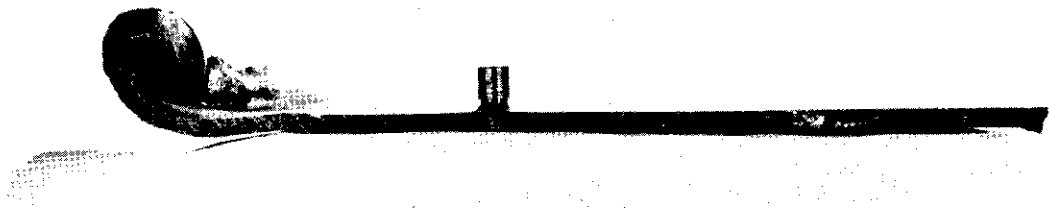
Side View of Fractured Disk #W-27 with Center Nib
